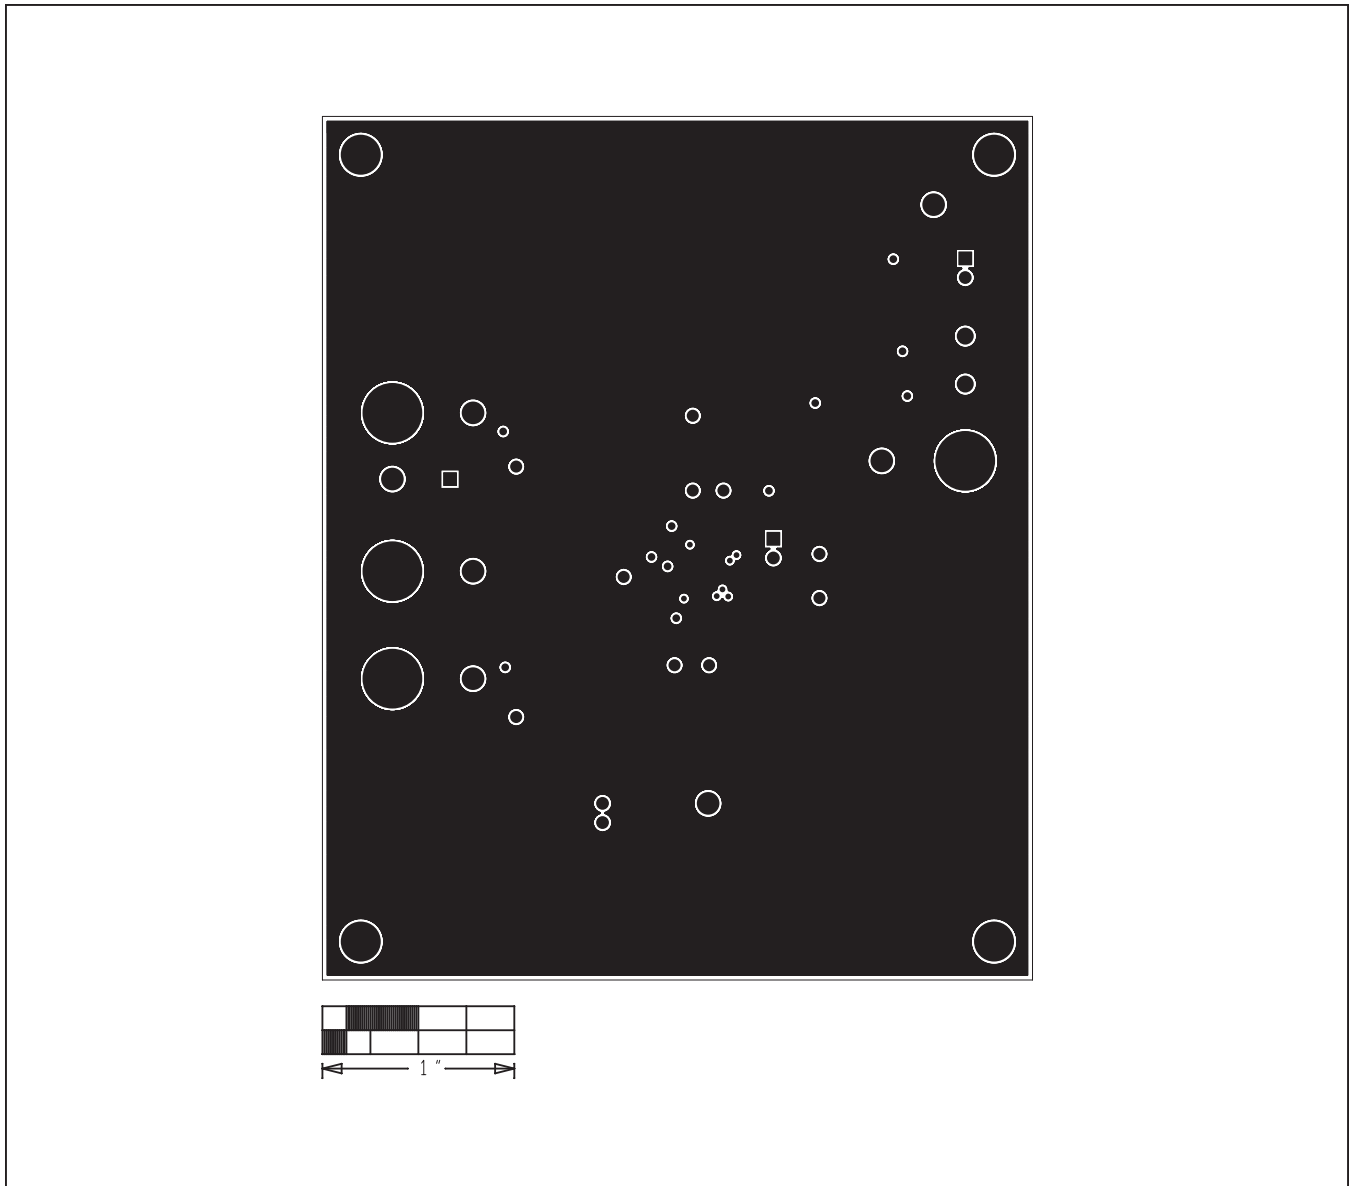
MAX15068 EV Kit PCB Layout—GND Layer 2
